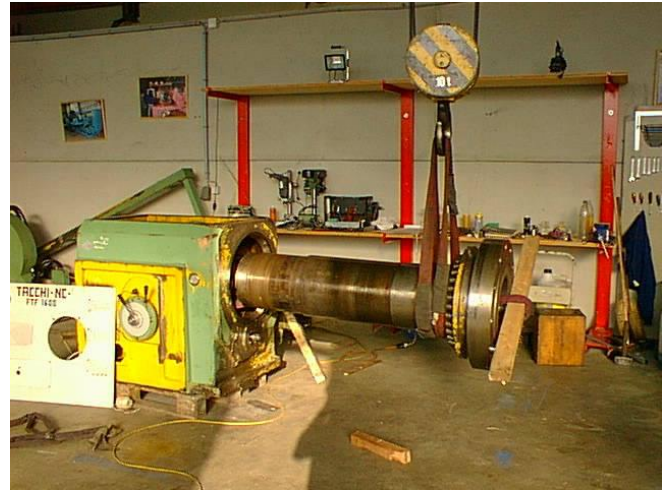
Each manufacturer has to make his own way of spindle bearings. If the heat presses too great a distance thrust bearing, certain types of bearings are not the best. Tacchi in our opinion, not chosen the best spindle bearing solution in the machine.
